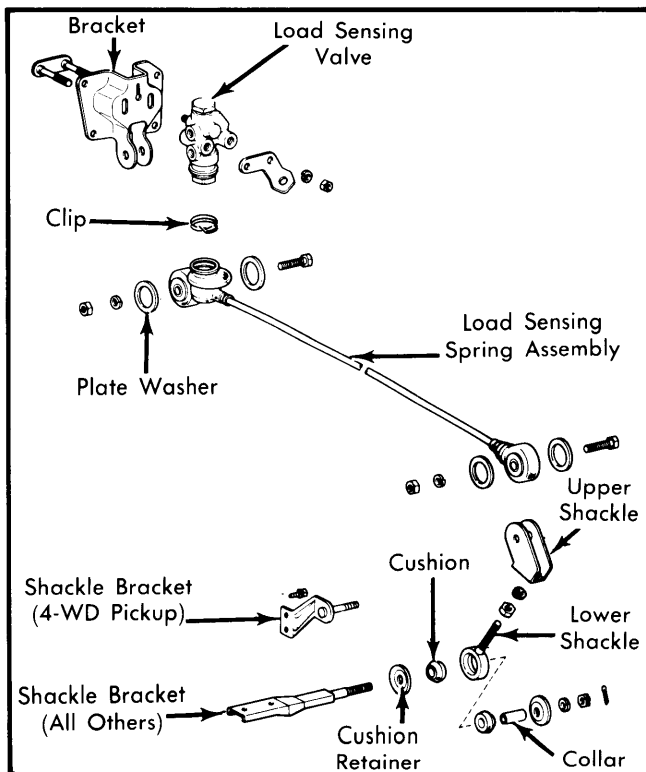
Exploded View of Load Sensing Proportioning Valve
